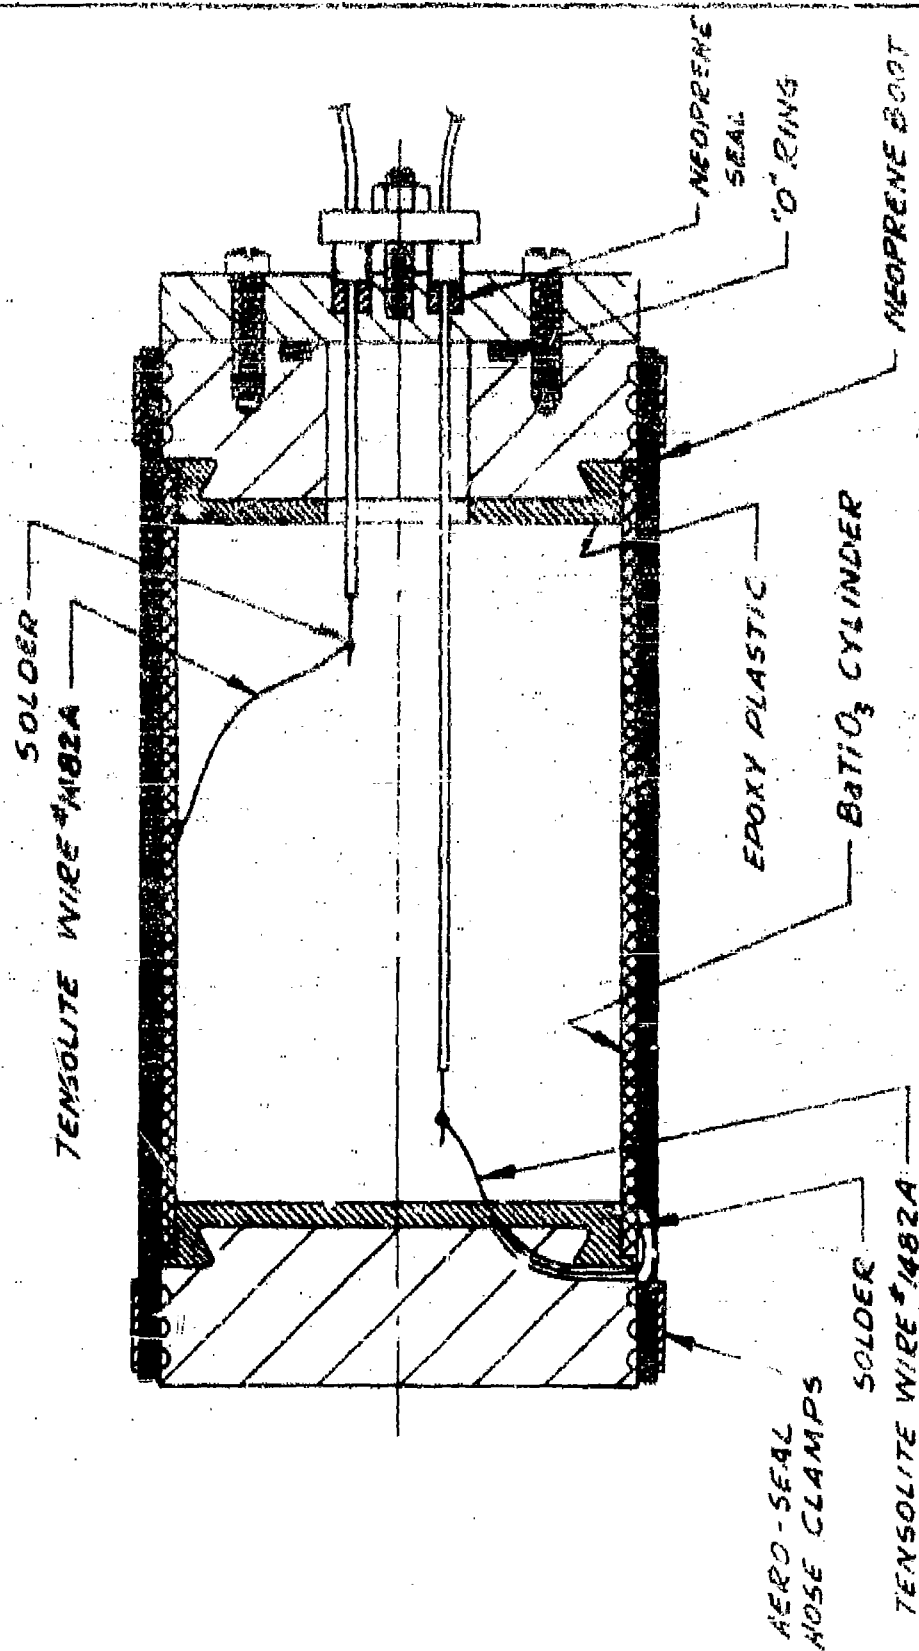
THIN-FILM ELEMENT ASSEMBLY
